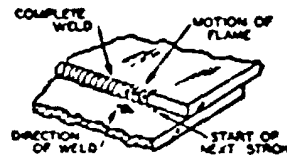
Technique for welding lap joint in the flat position
